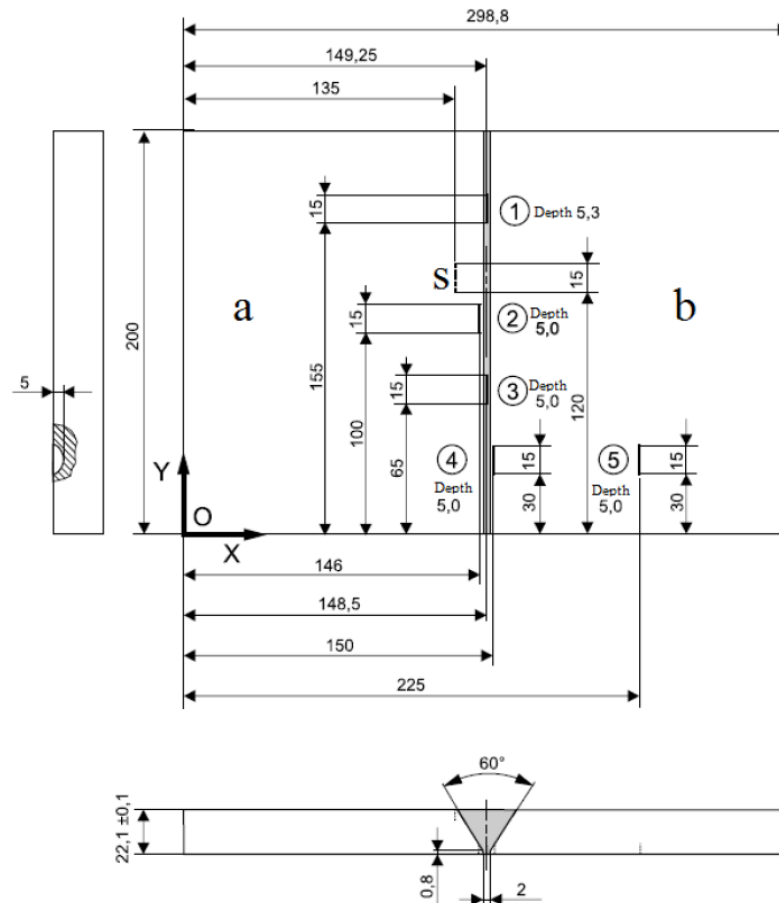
Test plate parameters and flaw locations from the side of the EDM notch openings.
